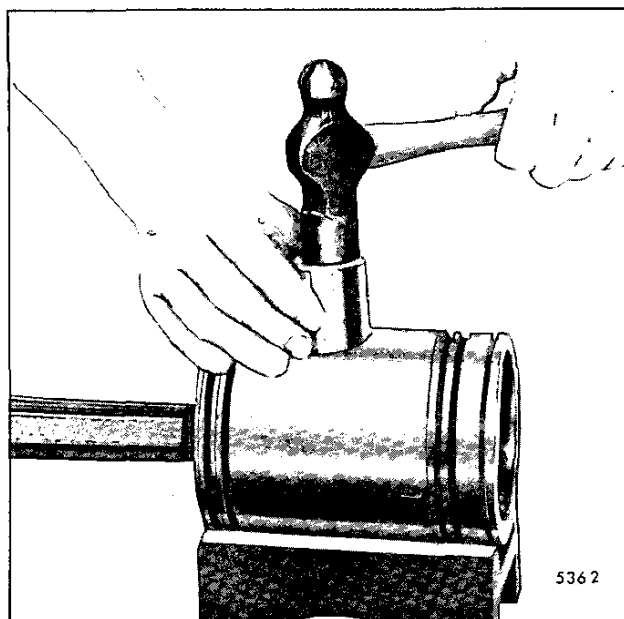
Installing Piston Pin Retainer Using Tool J 35572
